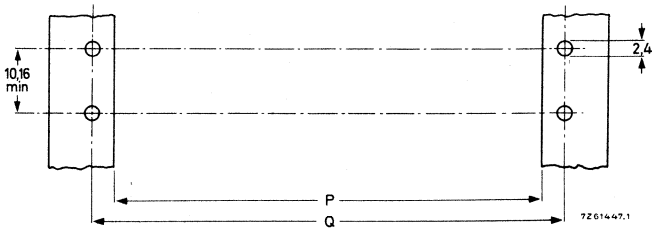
Hole pattern for rail mounting of male parts; see Table 4 for dimensions P and Q.
